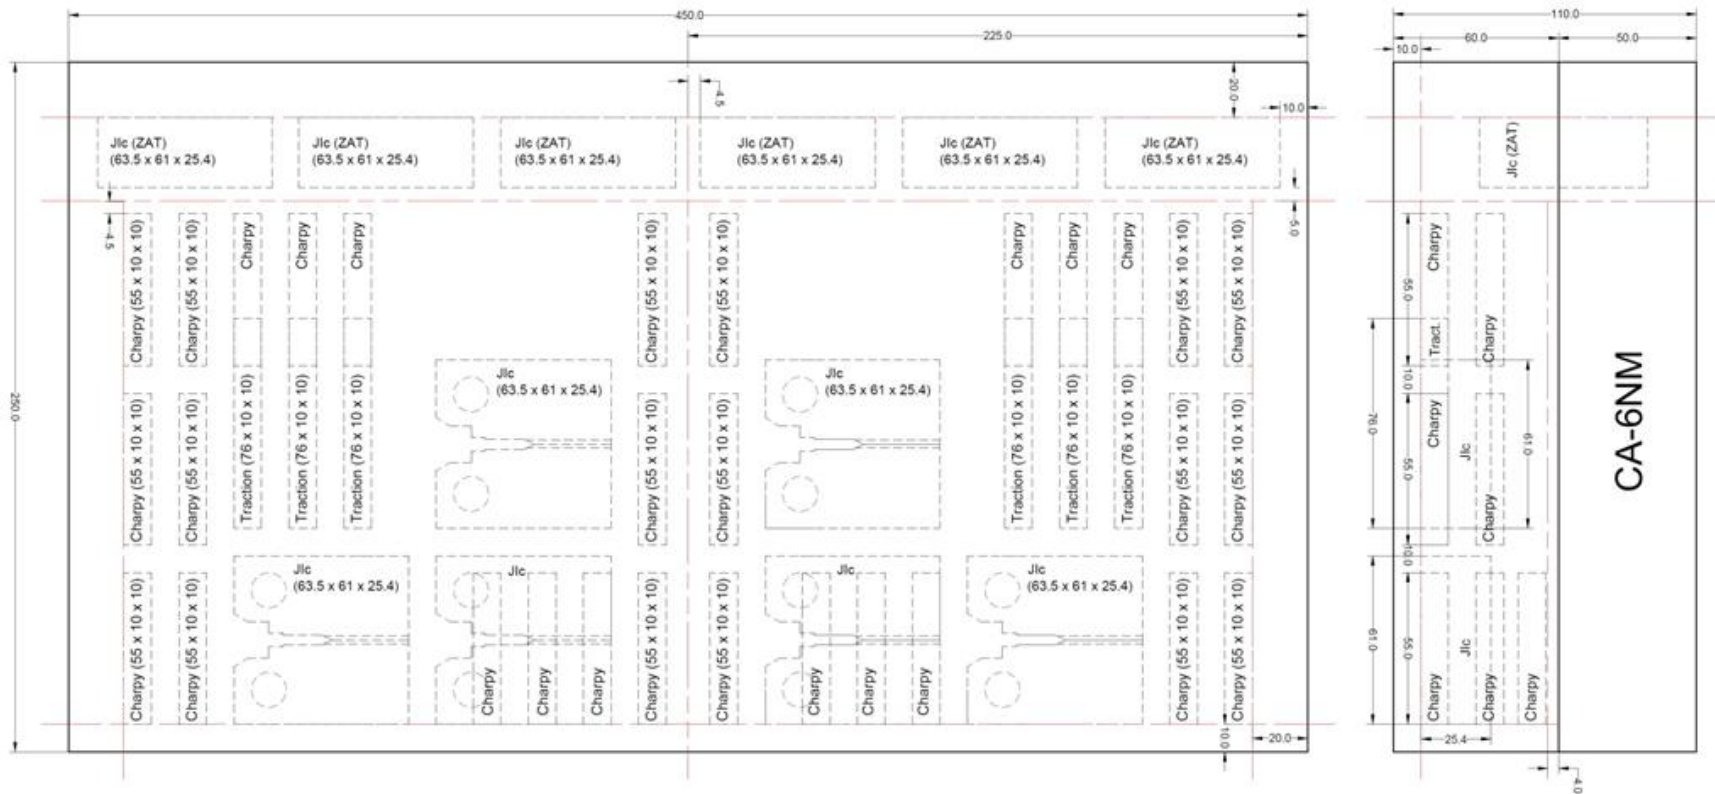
Cutting plan of samples to be cut from the weld metal block for both as-welded and heat treated conditions.
